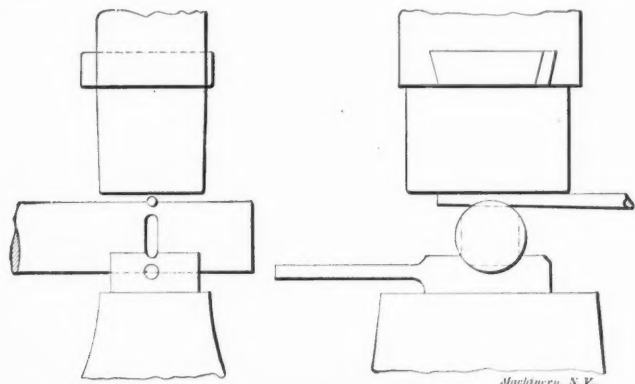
First Operation in reducing the Diameter of a Tool Steel Bar under the Steam Hammer.
